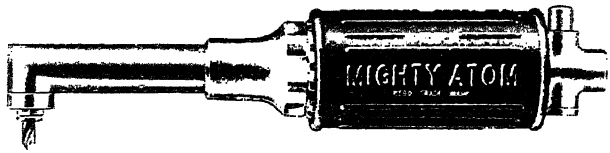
THE SHAPE OF THE HEAD OF THIS DESOUTER DRILL ALLOWS IT TO BE USED IN DIFFICULT POSITIONS
